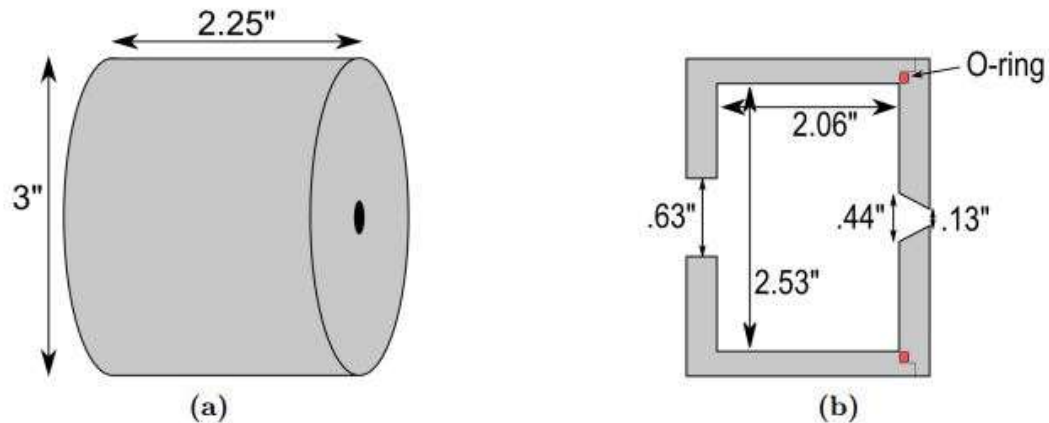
(a) External dimensions and (b) cutaway view of the effusion cell previously used [3].
